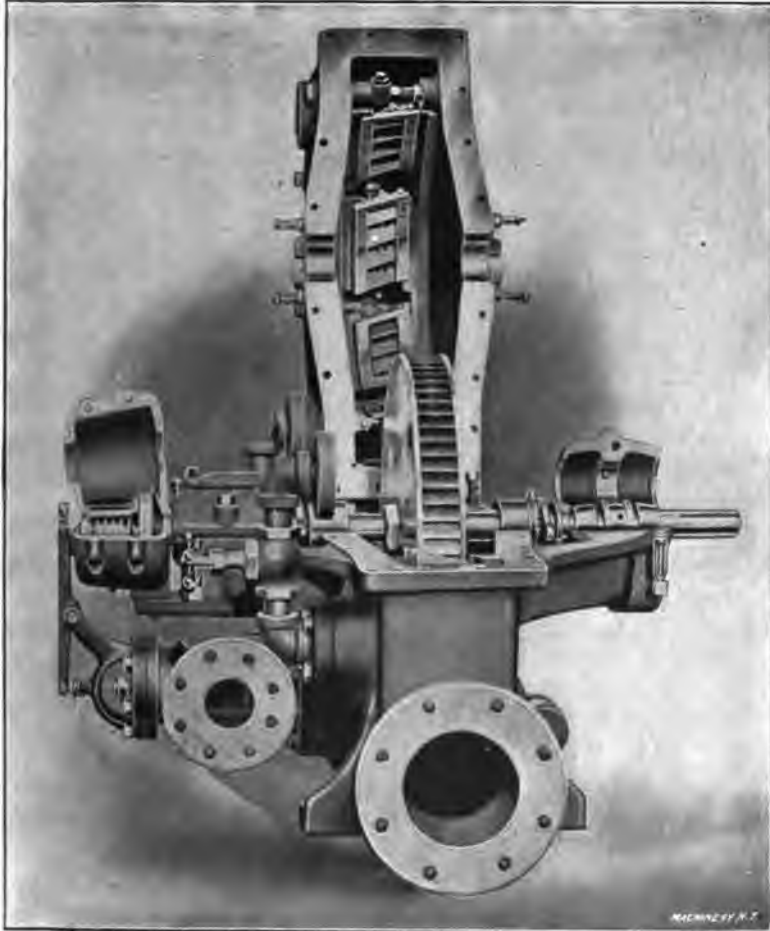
General View of the Terry Steam Turbine, showing how Casing is parted Horizontally
